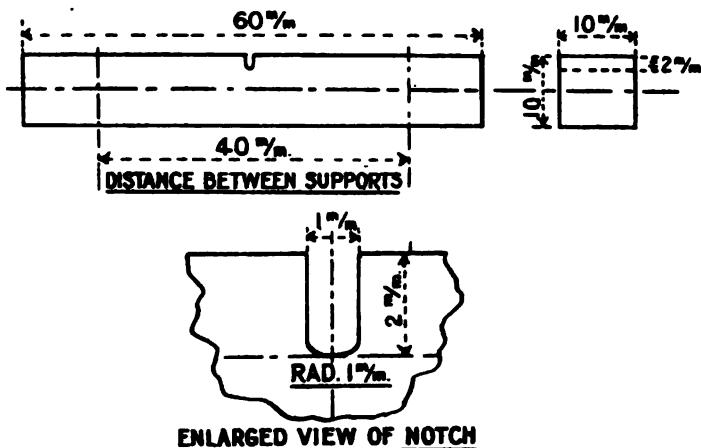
STANDARD MESNAGER IMPACT TEST PIECE AND NOTCH.
